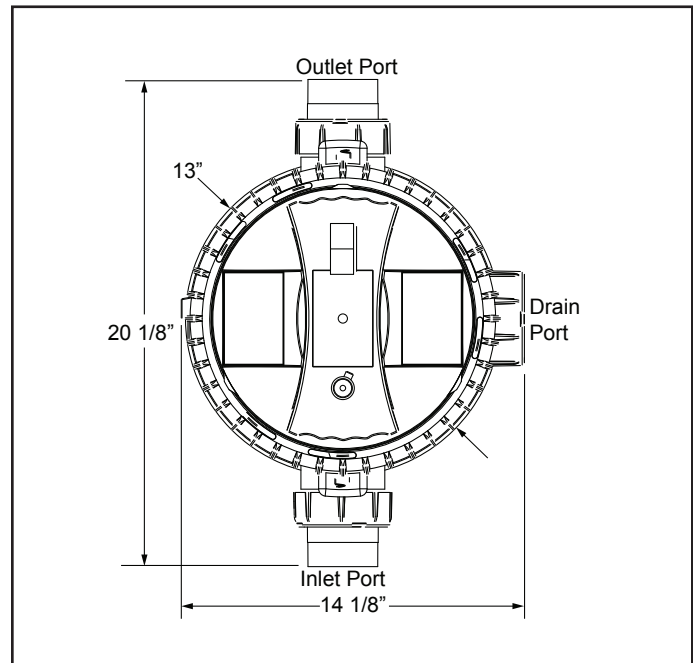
Dimensions, CS Cartridge Series Filter - Top View
